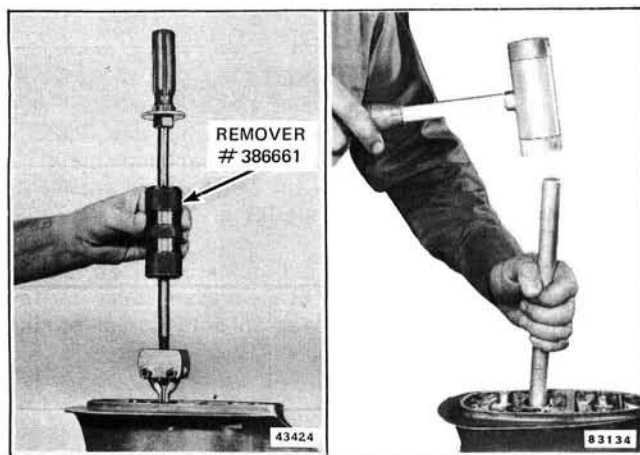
Pulling Driveshaft Upper Seals and Bearing
